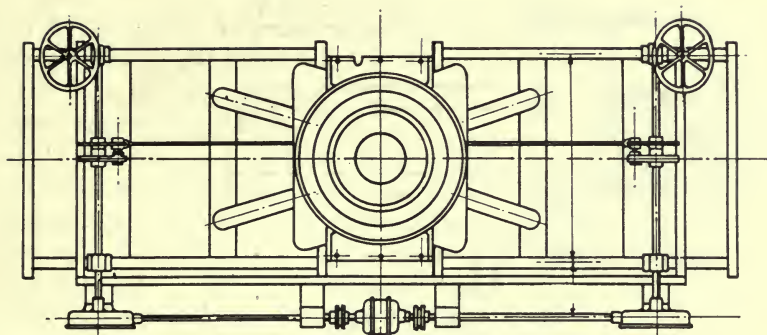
K. & K. MACHINE. LONGITUDINAL SECTION
